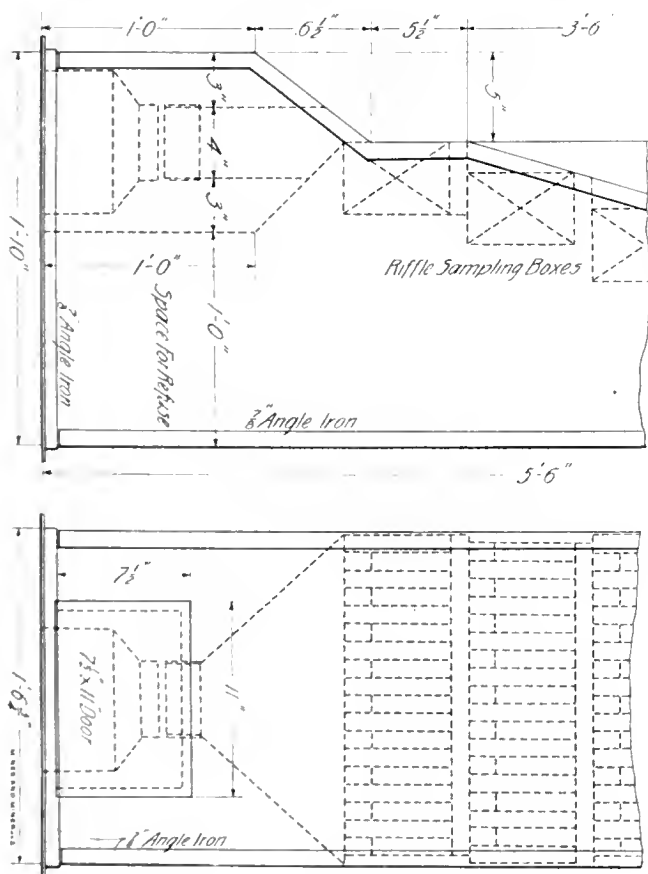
PLAN AND ELEVATION OF RIPPLE SAMPLERS
